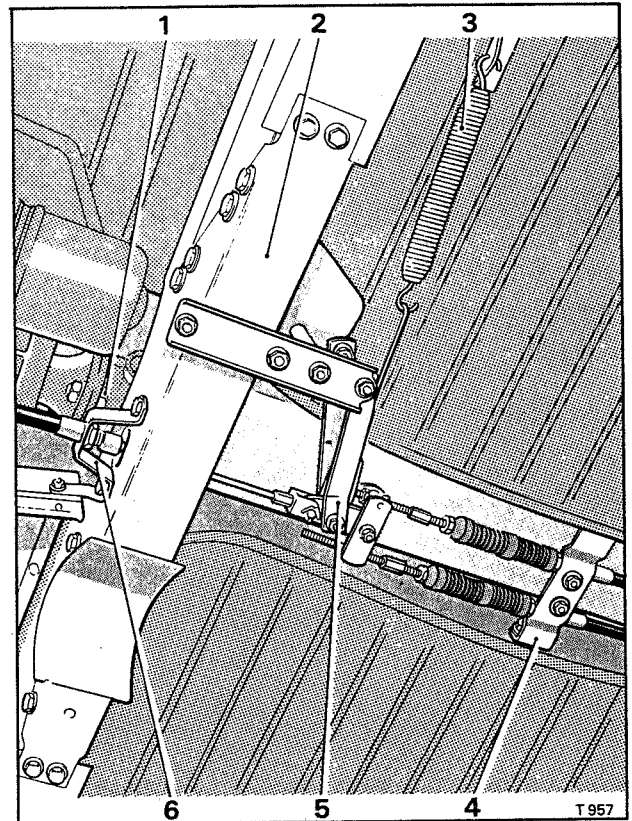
Parking brake intermediate linkage (Left-hand drive cars)
